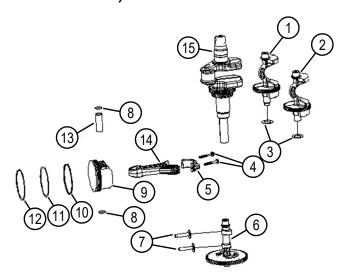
Crankshaft, Piston and Camshaft Assembly
